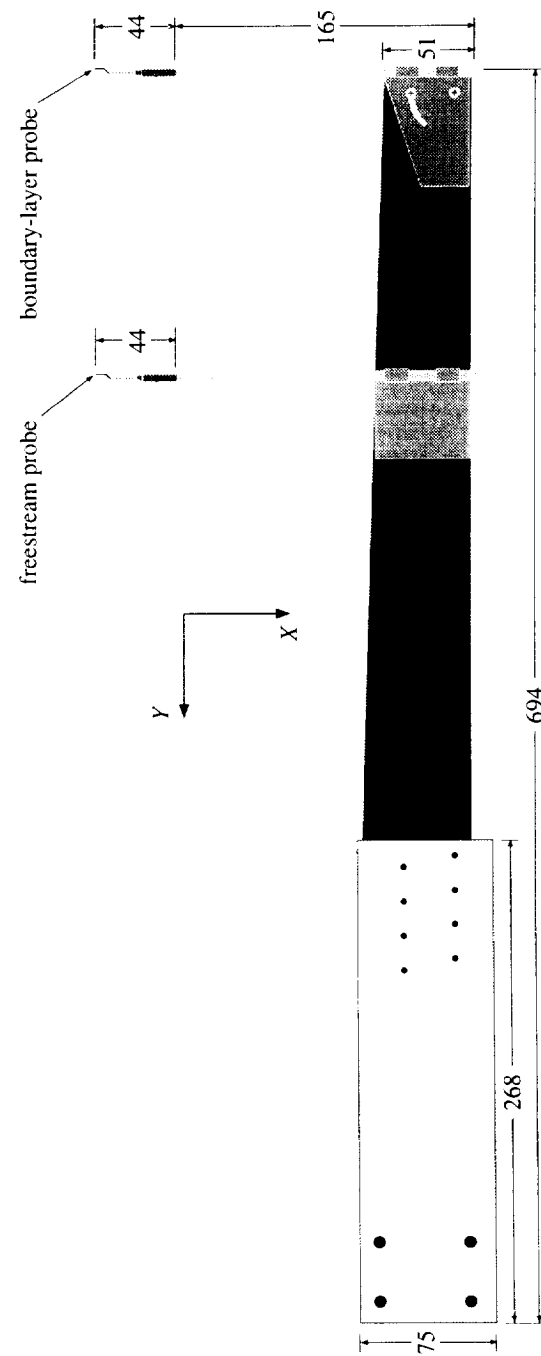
Plan view of hot-wire sting. All dimensions in millimeters.
